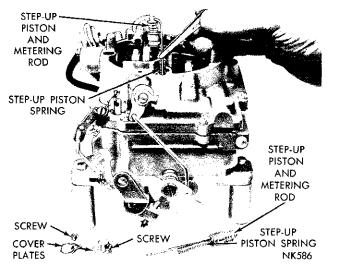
Removing or Installing Step-Up Pistons and Rods
